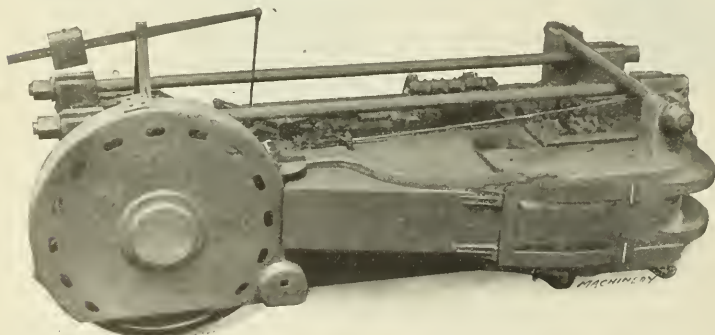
Opposite Side of Ajax Forging Machine shown in Fig. 1
